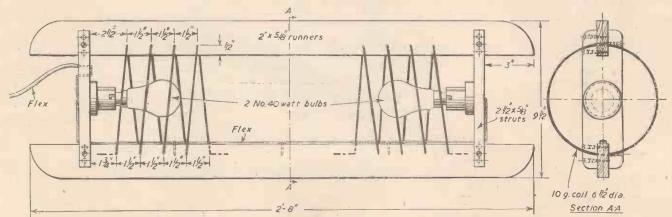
Side and sectional views, giving measurements and constructional details.
